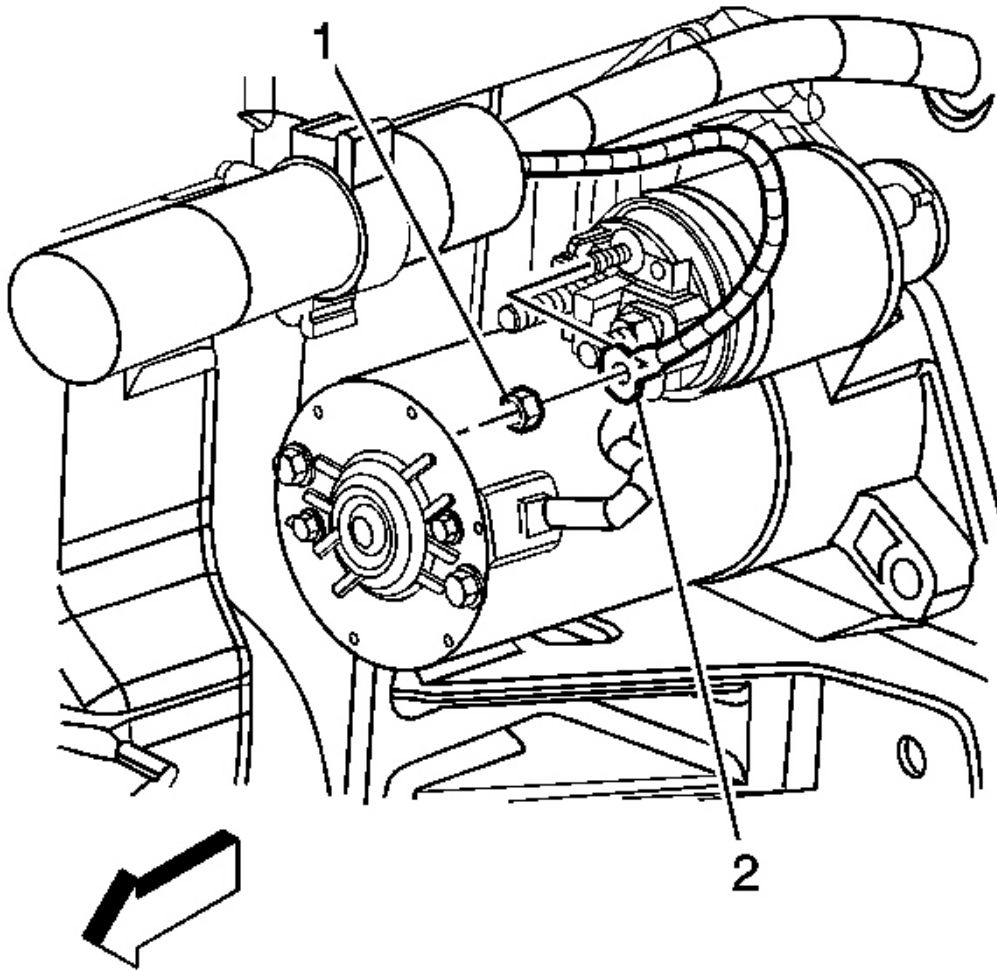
View Of Starter Solenoid S-Terminal Lead & Nut
